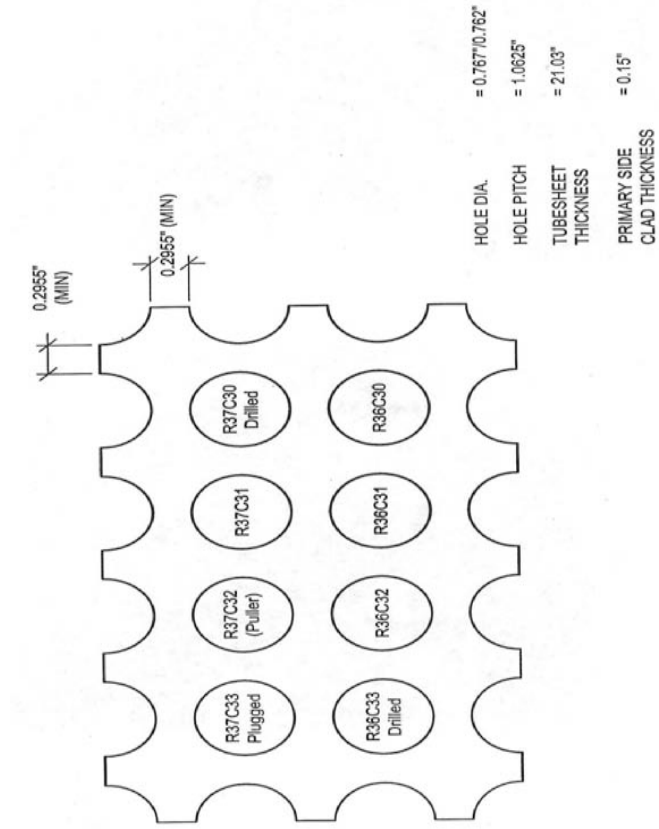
Tube sheet section TS2 removed from SGD (4x2 array of 19-mm (3/4-in.) diameter tubes).
